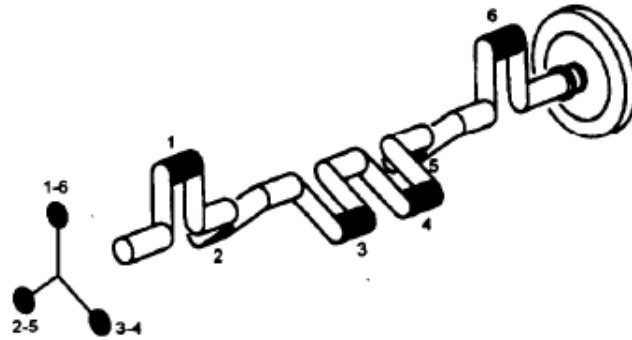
Illustration of the crank arrangement of a six-cylinder in-line engine.
